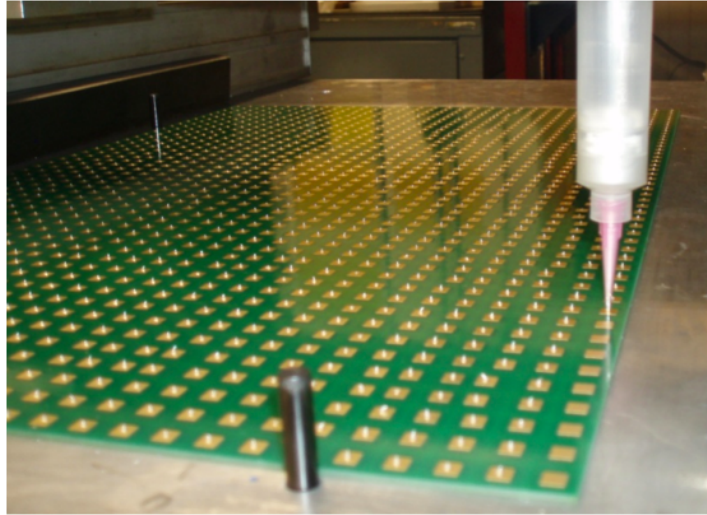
Photo of the gluing machine as it is placing glue dots onto the pad board..
